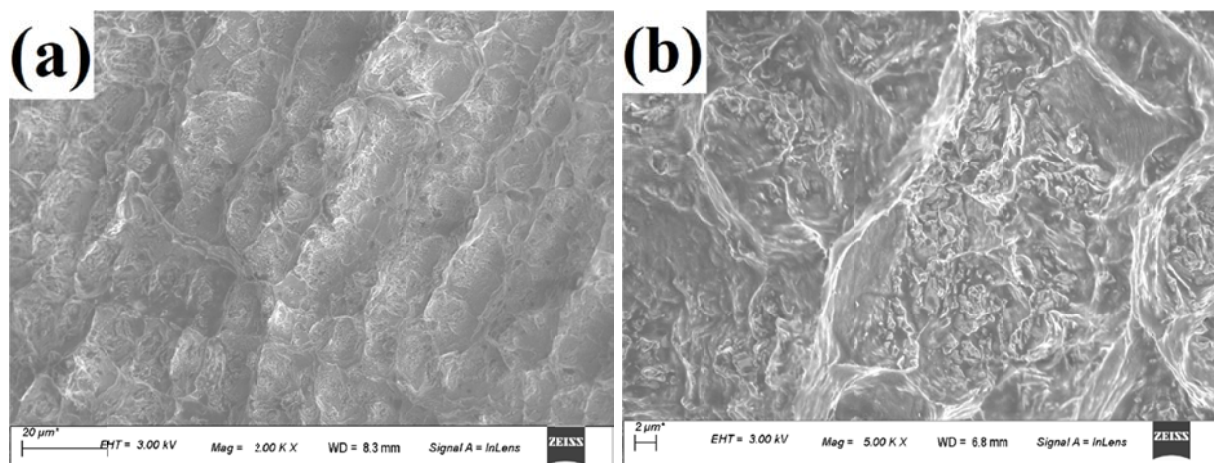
FESEM images of a tensile fracture surface of the welded specimen at (a) 2000 KX and (b) 5000 KX
